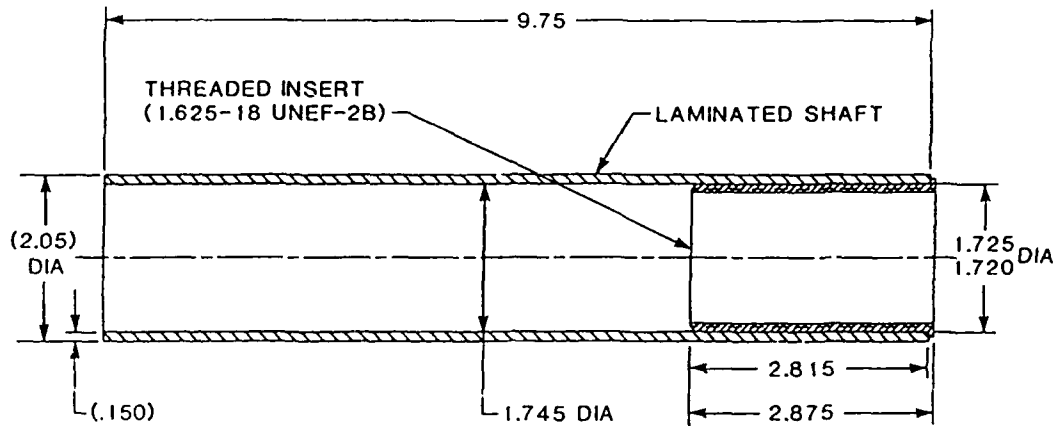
LAMINATED SHAFT ASSEMBLY.
